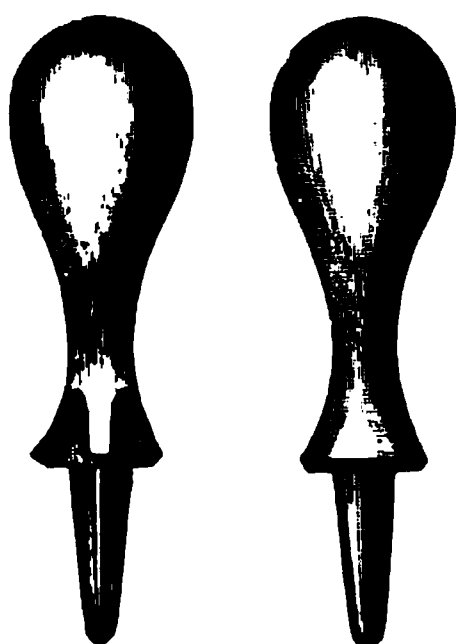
Boring-tool. Fig. 19. Smoothing-tool.
